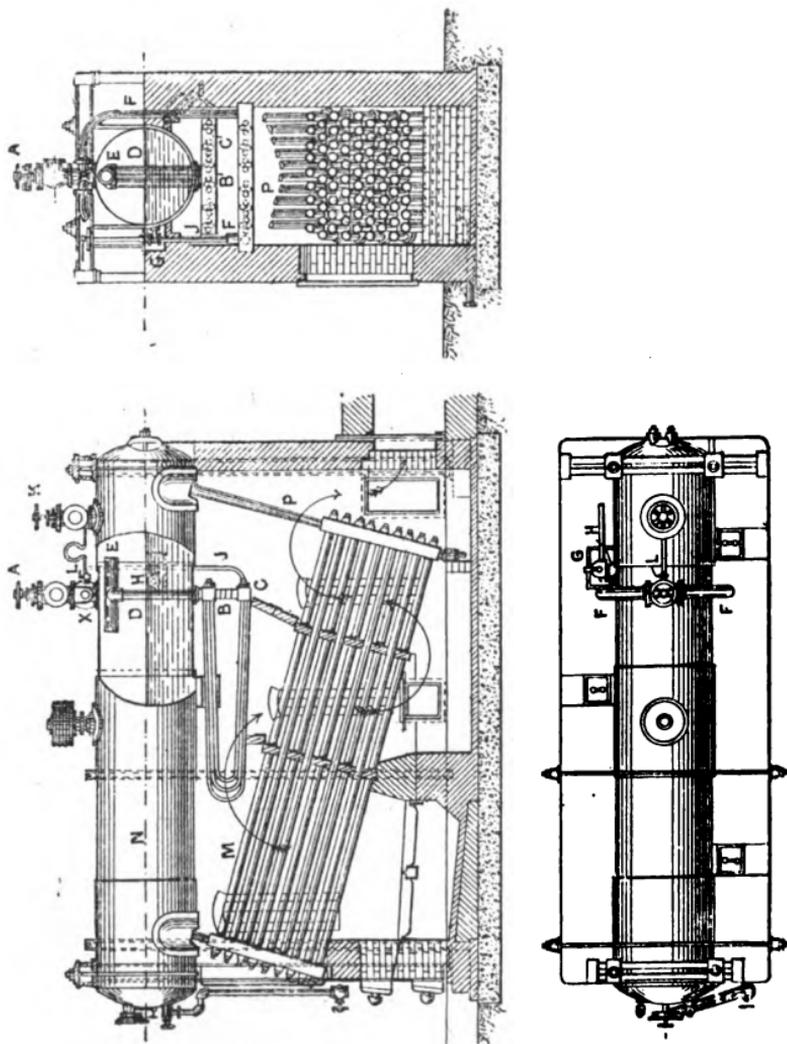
Pabcock and Wilcox Water-tube Boiler.
